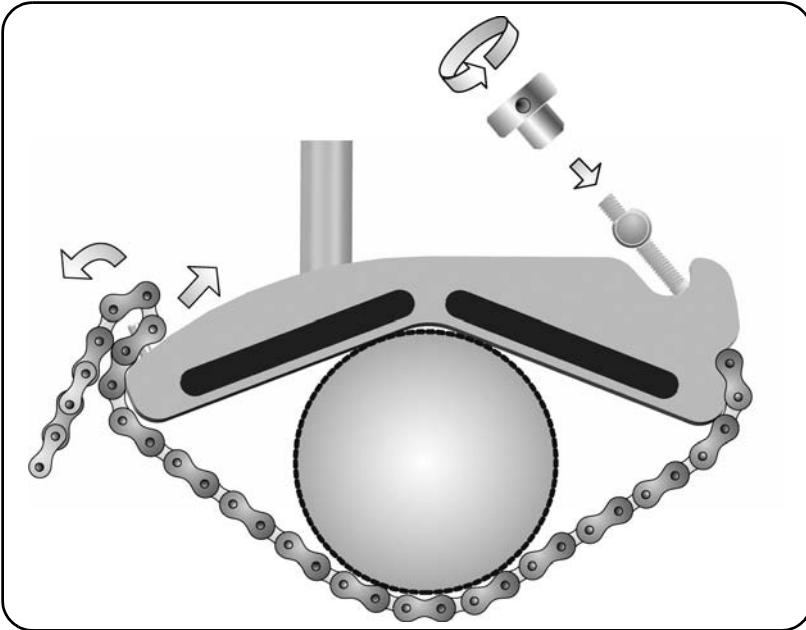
Attachment of magnetic / mechanical fixture with chain
